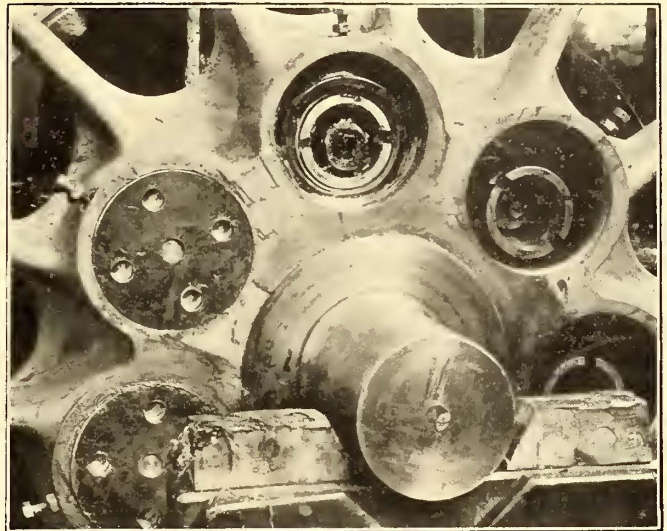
DETAIL OF DRIVING WHEEL, SHOWING POCKETS
